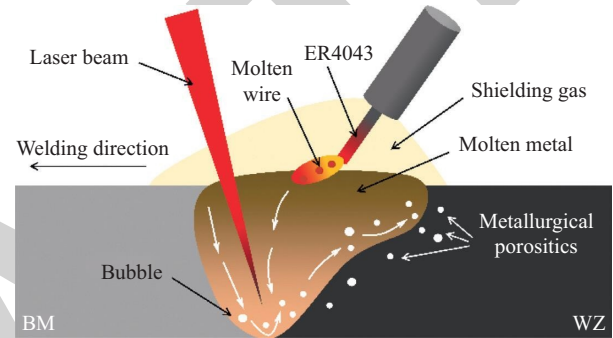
Formation mechanism of metallurgical pores during laser-MIG hybrid welding process.
